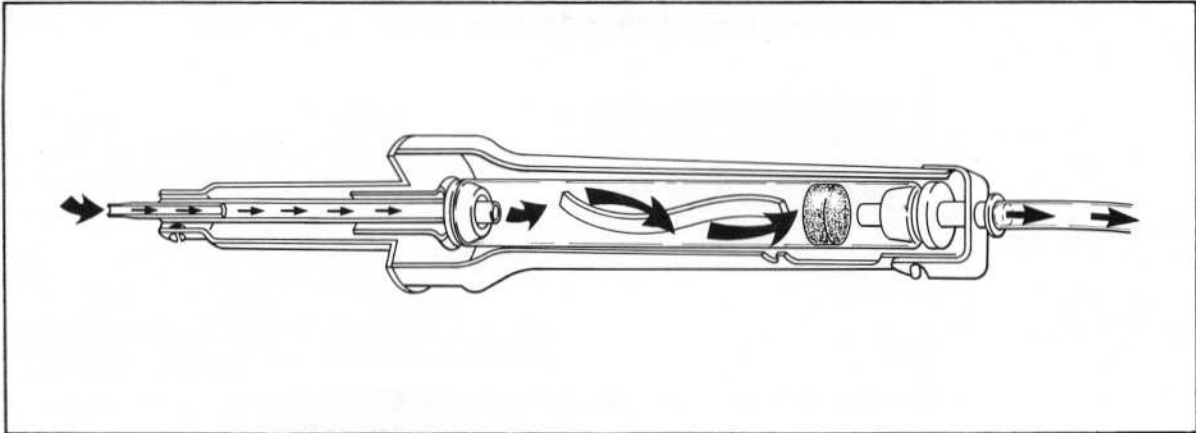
CUT-AWAY VIEW OF DUAL PATH SOLDER EXTRACTOR MODEL SX-25
